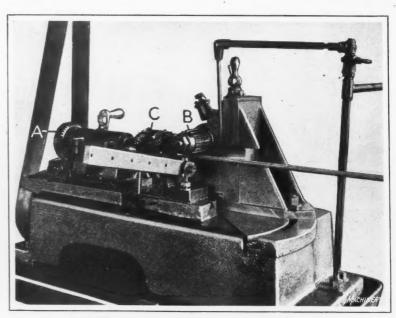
Special Machine for cutting Pinion Rod by Hobbing Process
